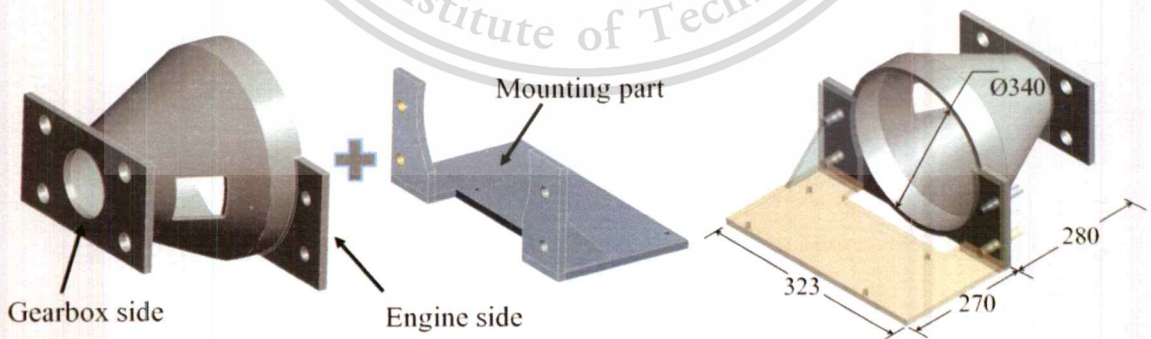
Clutch housing prototype CAD model (all dimensions in mm)
